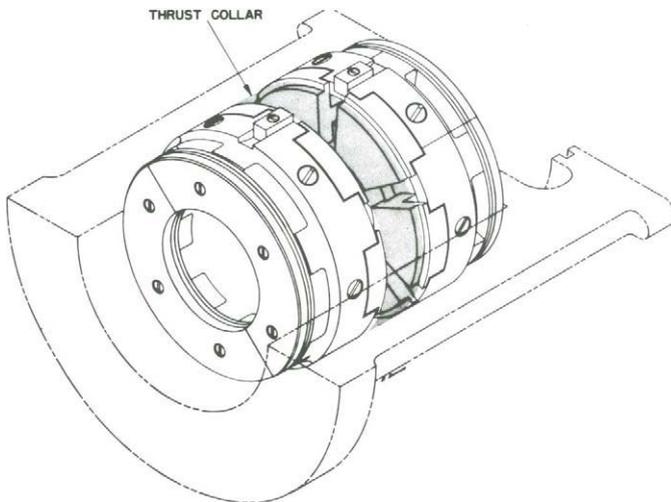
Double acting self-equalizing thrust bearing assembly (thrust collar removed) (Courtesy of Elliott Company)
